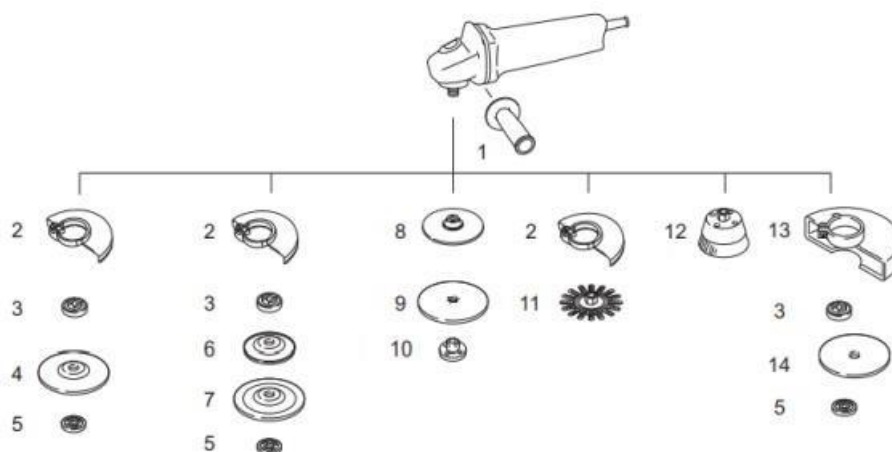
Type of wheel and disc (Li & Axinte, 2016).
